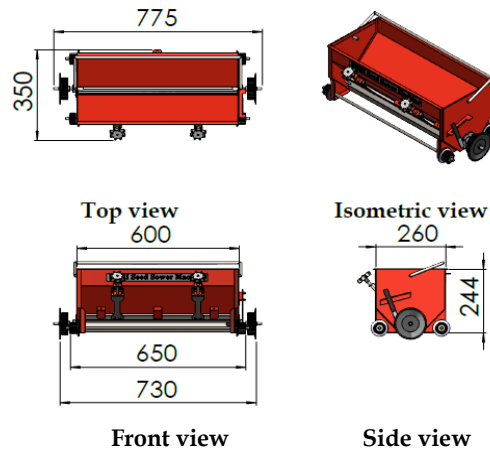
Overall dimensions of BRR seed sower machine (dimensions are in mm)
